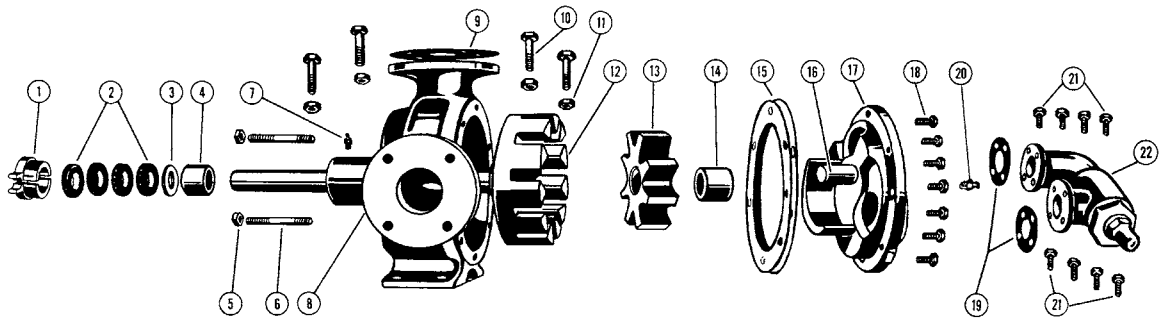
EXPLODED VIEW MODEL H432 AND HL432 PUMP
